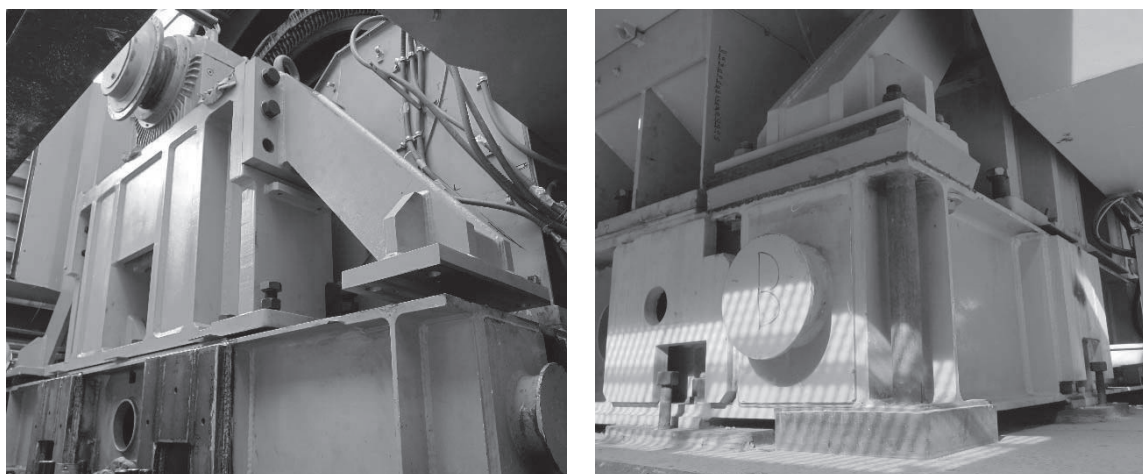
New pedestal and reinforcement plates (left), grout and prolonged anchorbolts (right).
